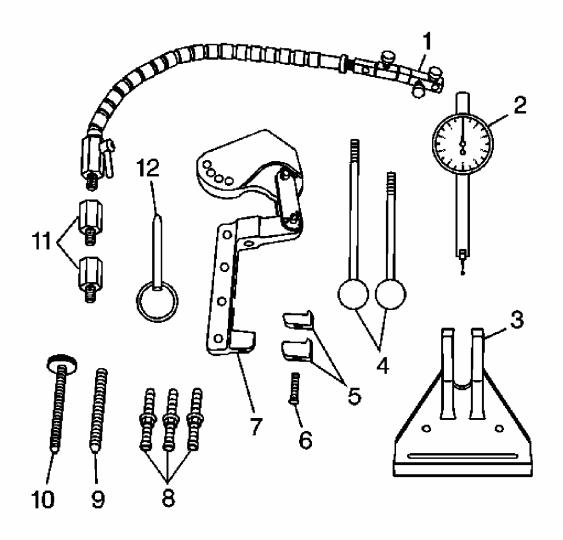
Identifying Rod Bearing Clearance Checking Tool Courtesy of GENERAL MOTORS CORP.
